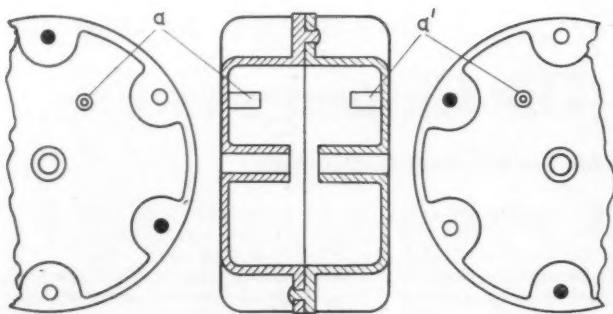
An assembly of two identical die-castings ("self-assembly")
